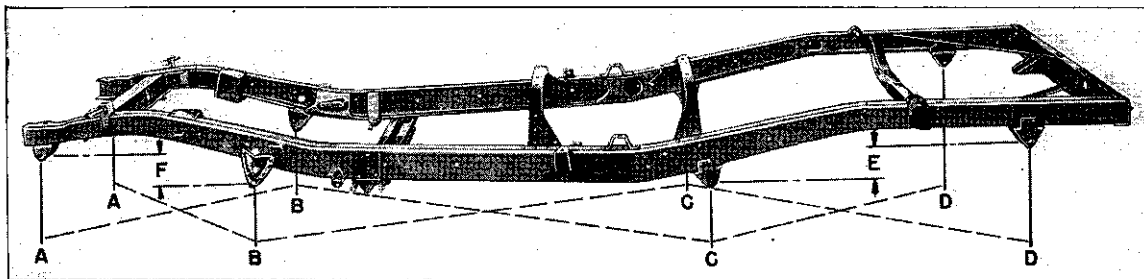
TYPICAL FRAME SHOWING POINTS FOR MEASURING ALIGNMENT
